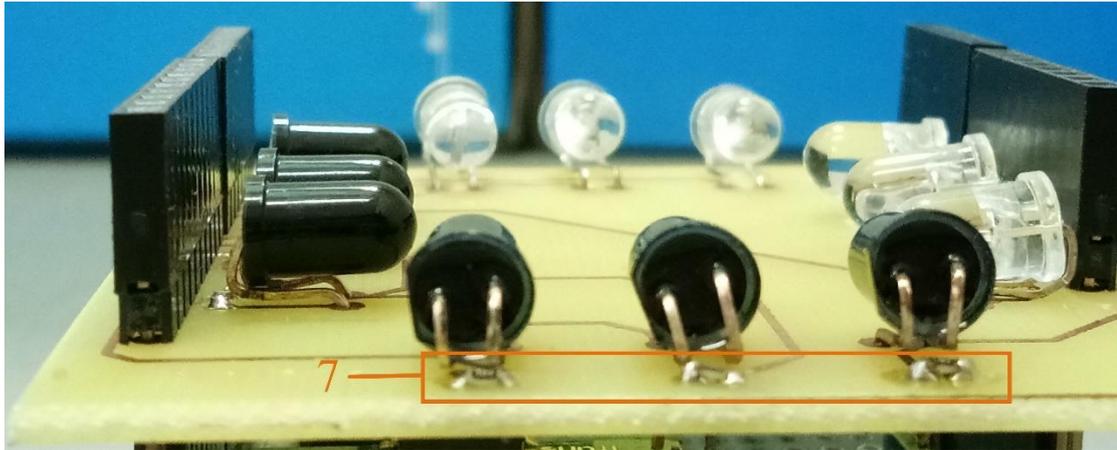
10K ohm SMD resistors is solder on PCB.
